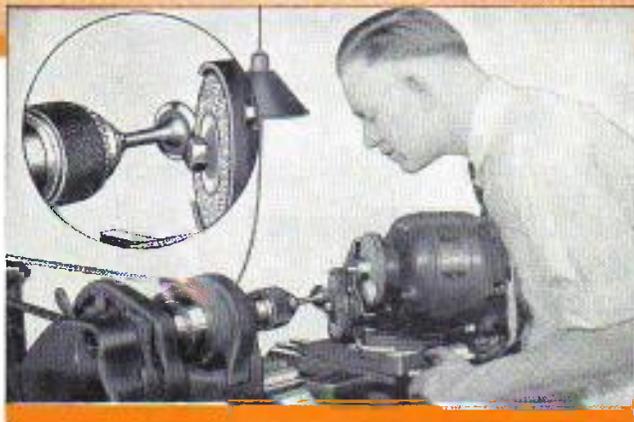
Refacing a Valve by Grinding in the 9" "Workshop" South Bend Precision Lathe.
